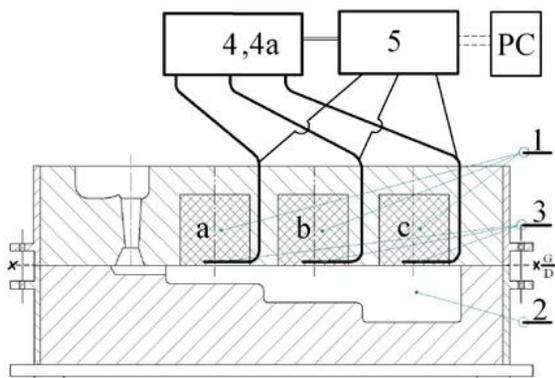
Test stand for direct measurement of gas evolution from moulding sands: 1) mould elements (height of mould cavity under the measuring point: a-13 mm, b-26 mm, c-40 mm), 2) mould cavity with the gating system, 3) gas sampling location, 4) and 4a) gas sensors, 5) Agilent recorder [8, 9]
